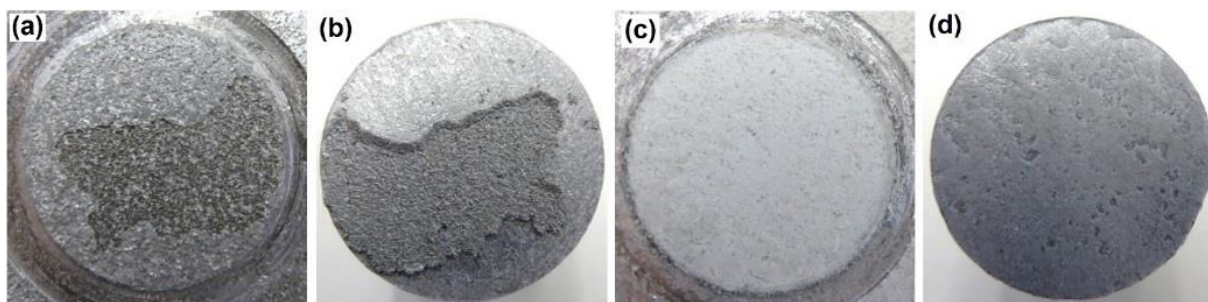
Fracture surface of the coatings after pull-off adhesion test: TSA coated sample (a) and dolly (b), and TSA/PEO coated sample (c) and dolly (d)
